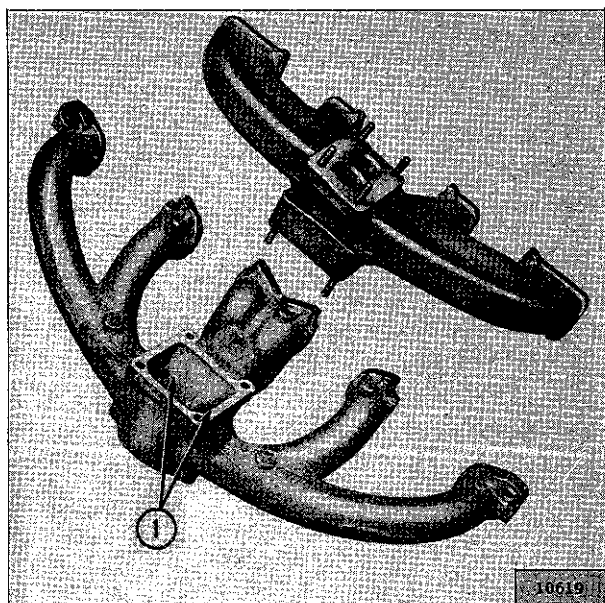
MODEL L6-226 INTAKE AND EXHAUST MANIFOLD (Double-throat Carburetor)
